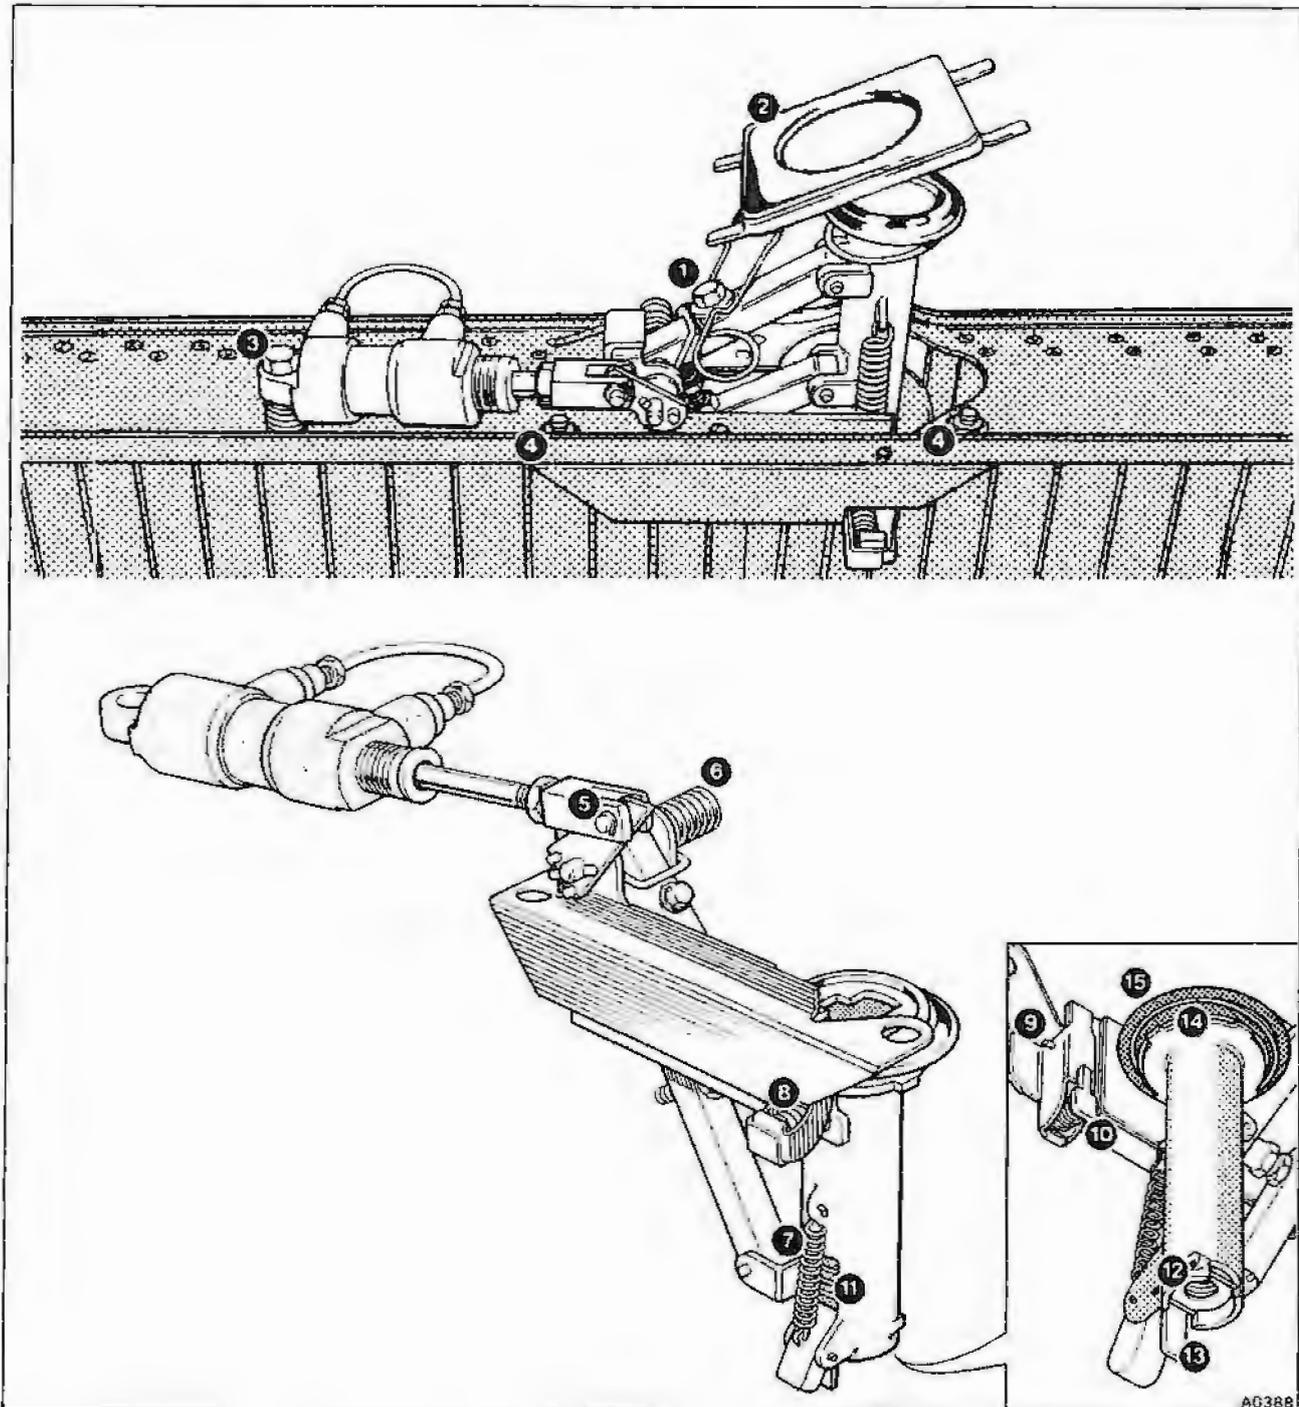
Mascot retract mechanism (hydraulic damper)
